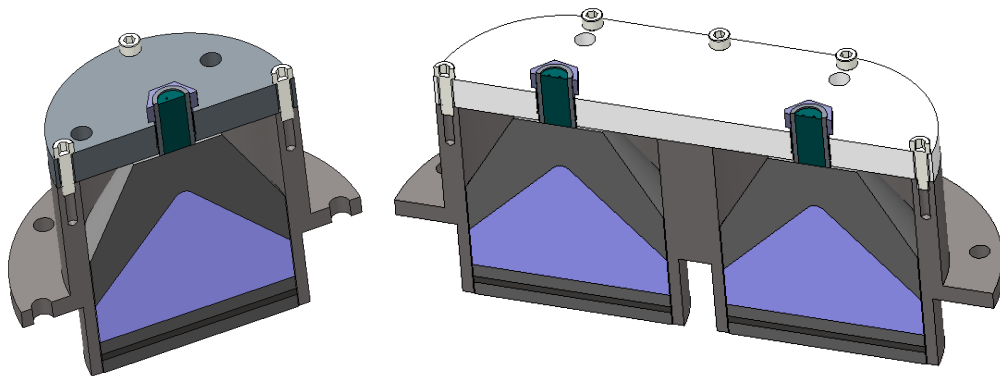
The explosive housing assemblies. On the left is one housing from the wideset design, on the right is the narrowset design.
